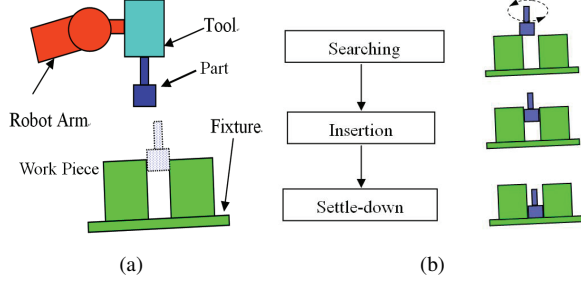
a) A robotic system to perform a high precision assembly process. b) Steps to perform the high precision assembly process.
